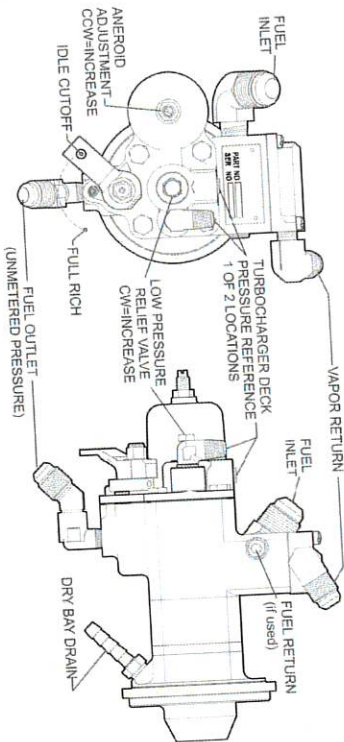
Aneoid and Mixture Control Equipped Fuel Pump, Turbocharged Engine
